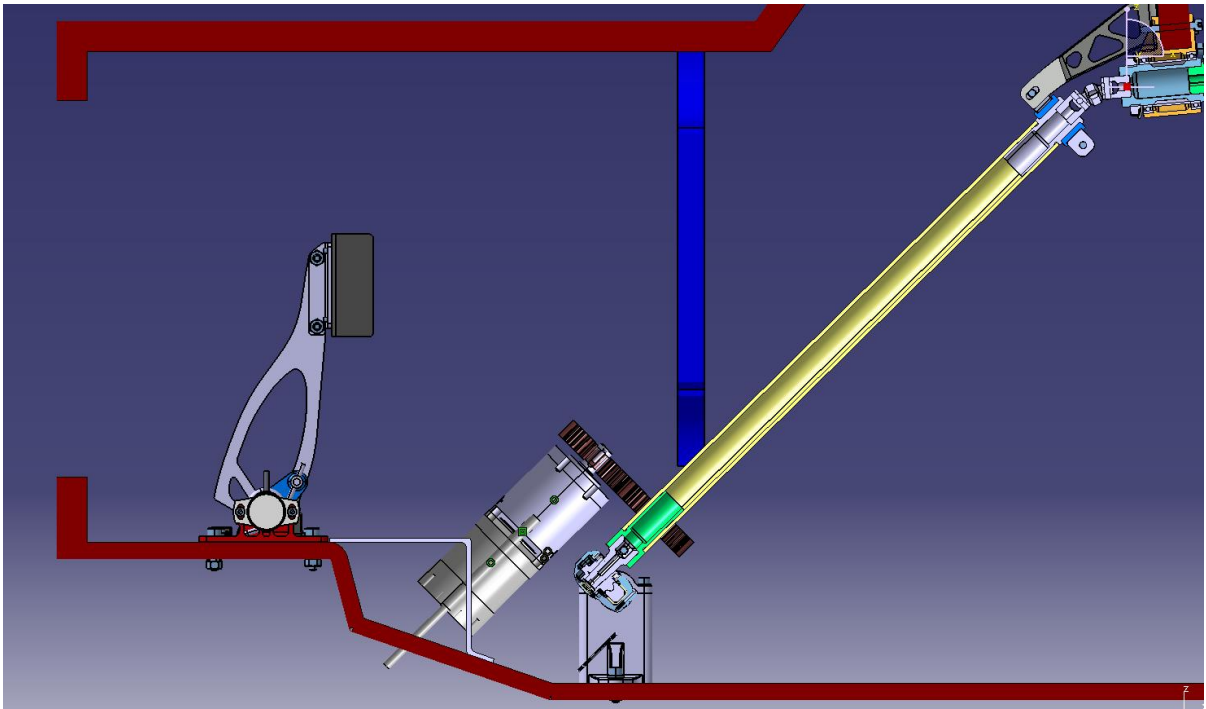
Actuator assembly & steering system in SC19 - XZ plane section view - Solution 3
